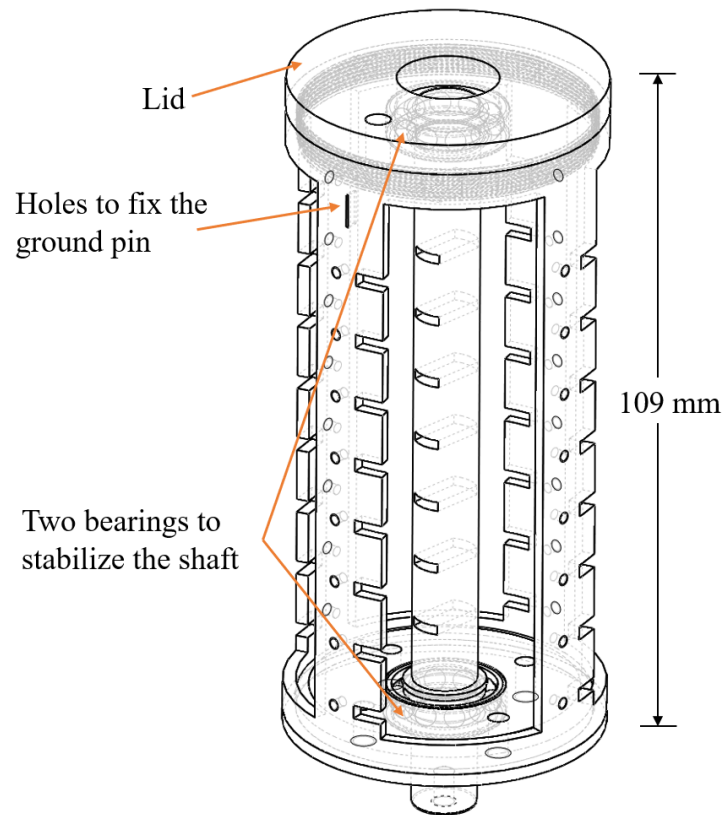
The assembled housing, lid, and shaft in Design III. The lid is assembled by the inner threads on the top of the housing. Two bearings are used to stabilize the shaft. The extended part of the housing in the previous designs has been deleted. The overall height of the sensor is 109 mm. The diameter remains the same as that of the previous designs.
